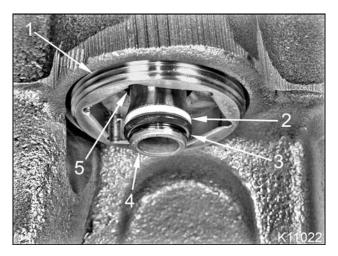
Injector oil inlet adapter installed in high-pressure oil rail
